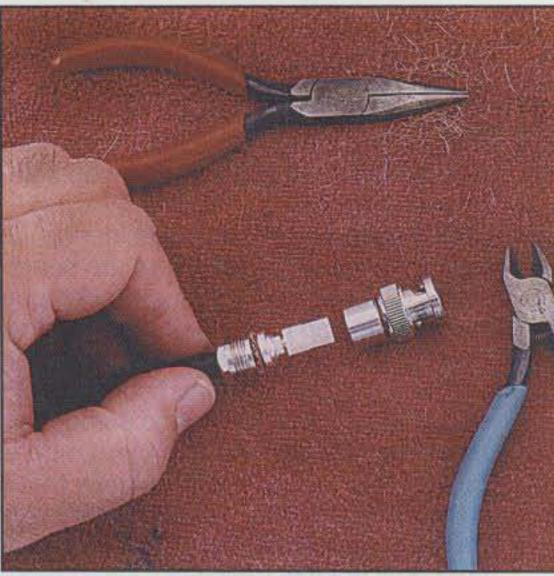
Slide the shell onto the assembly. Hold the cable and connector body still with a wrench while you turn the locknut. Try not to twist the connector body, since that may twist the wires inside the connector.
